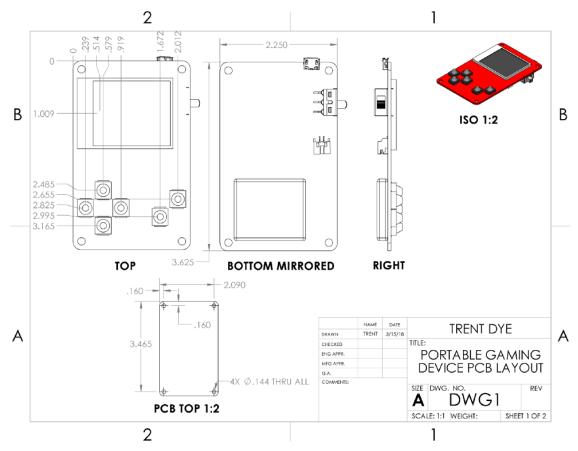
DESIGN OF A BASIC LAYOUT OF THE PRINTED CIRCUIT ASSEMBLY, USED FOR THE PLACEMENT OF PCB FOOTPRINTS.
